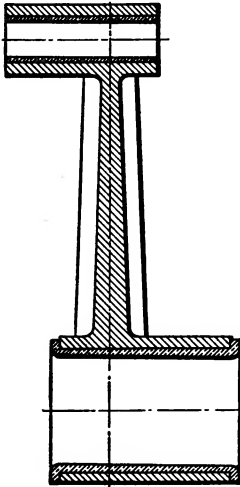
Offset Connecting Rod Showing How Bearings Wear
